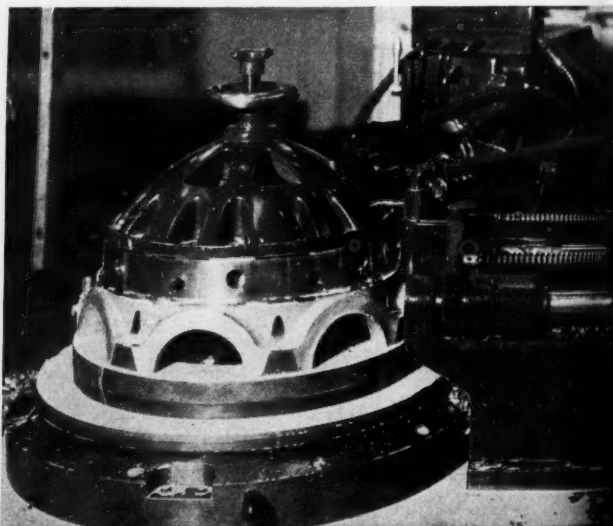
Drilling and reaming the holes by which the valve intake mechanism is assembled to the middle crankcase section.
